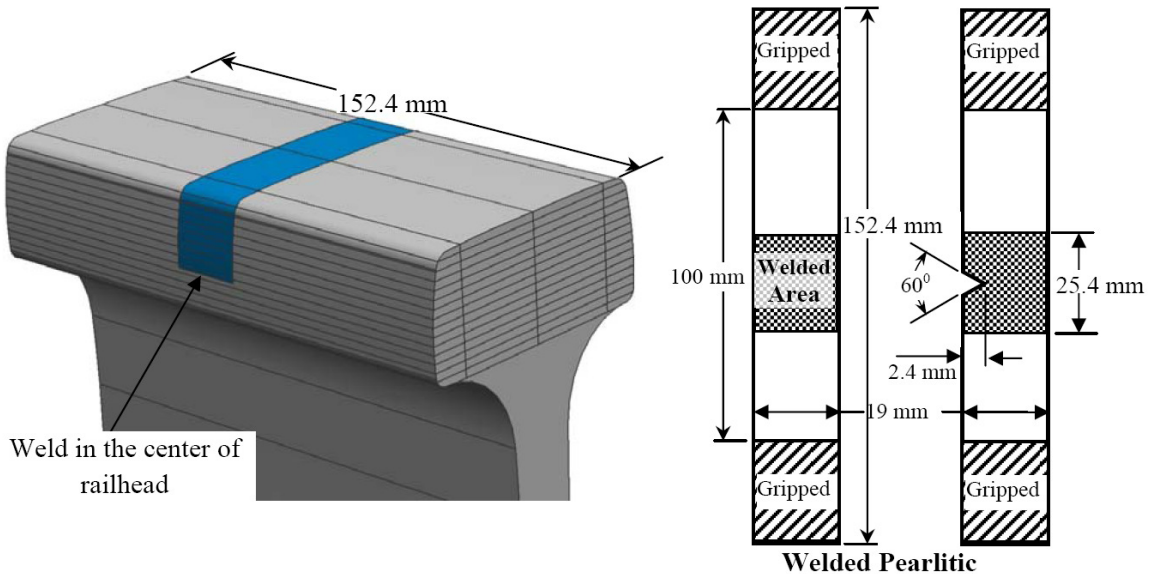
Schematic diagram of the railhead showing how specimens were machined (left) and the dimensions of the welded test specimens (right).
